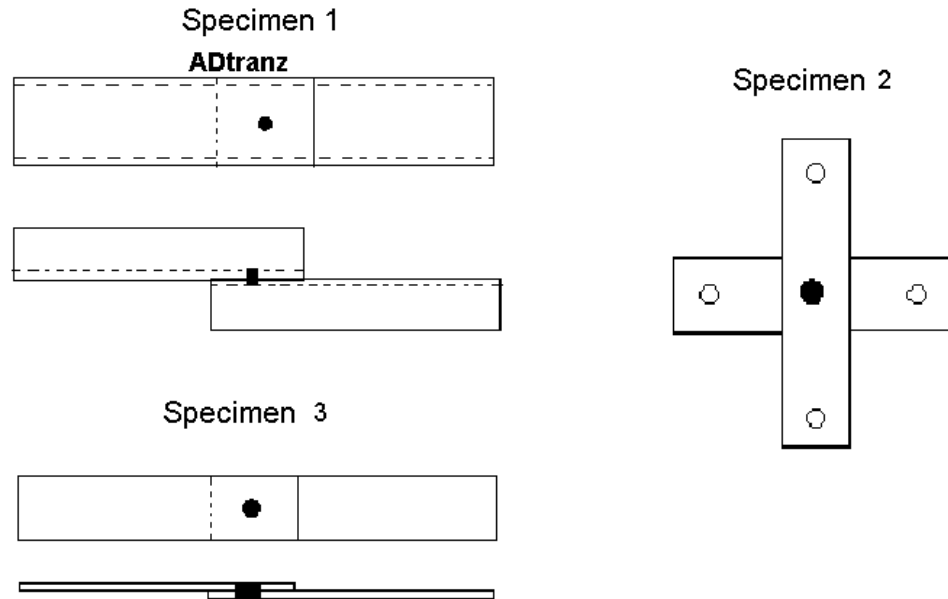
Lap joint specimens used to study spot welding, adhesive bonding and weldbonding.
